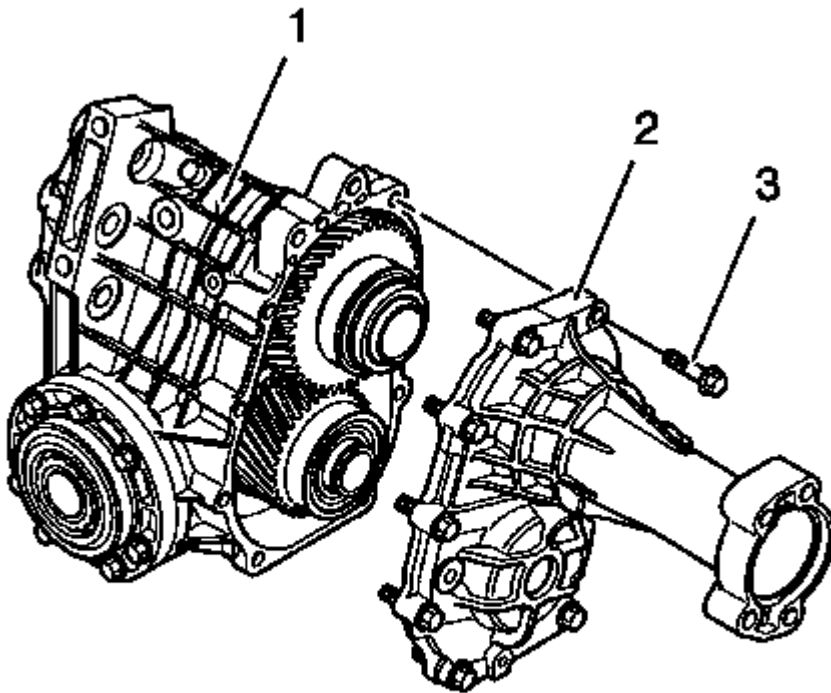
View Of Transfer Case Housing & Rear Extension Housing
